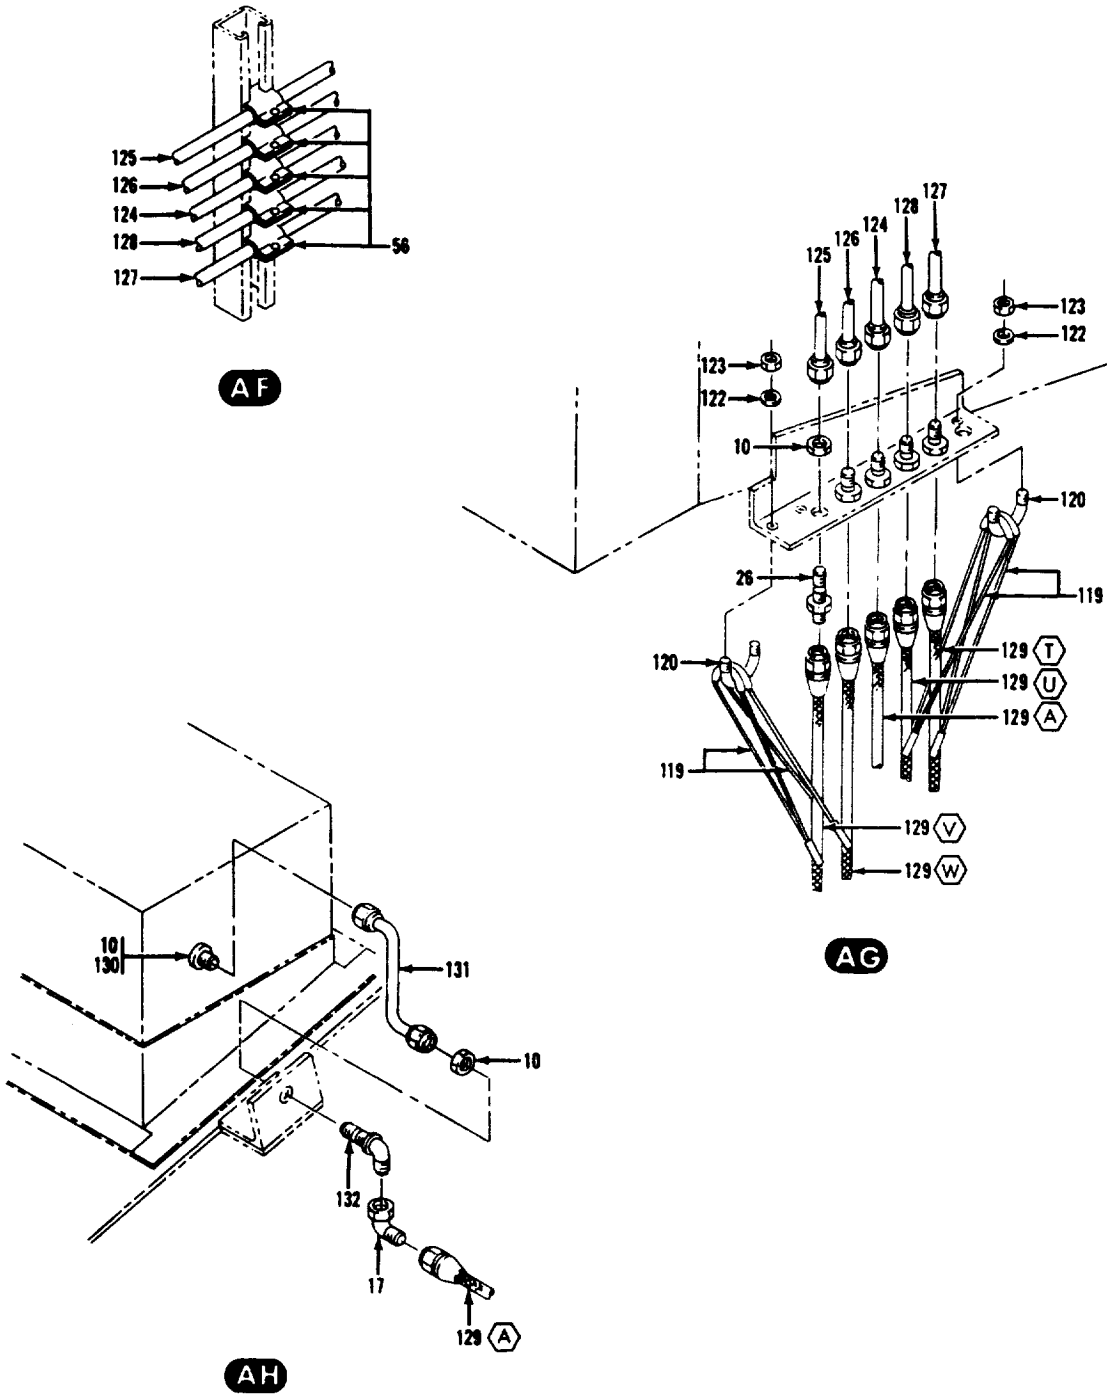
Tubing Installation (Sheet 11 of 17)
